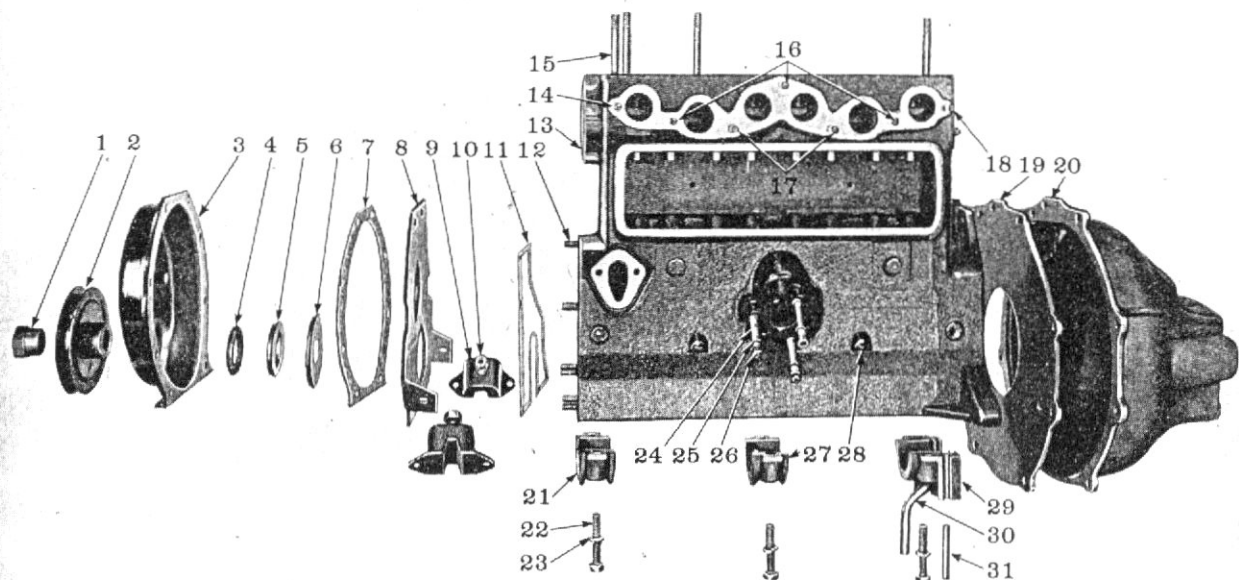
TIMING CHAIN COVER, CYLINDER BLOCK AND BELL HOUSING
